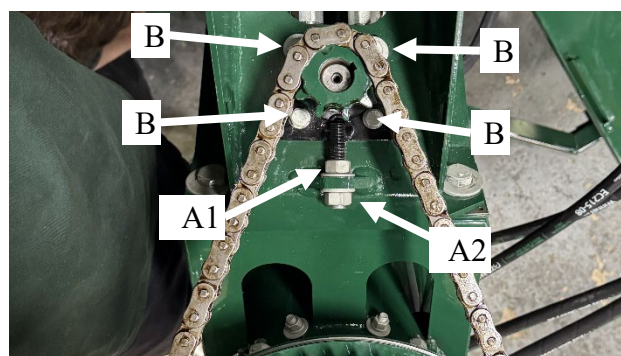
Hydraulic Swing Adjustment (Shields Removed for Clarity).
